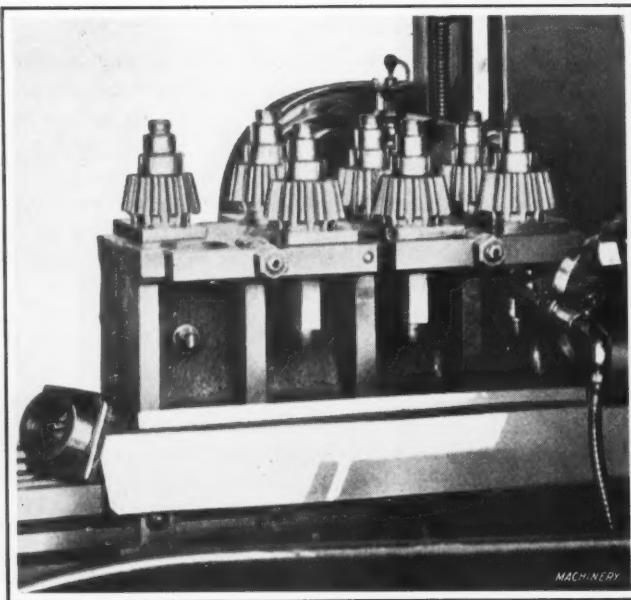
Side View of Fixture for milling Square-stem Pinions
